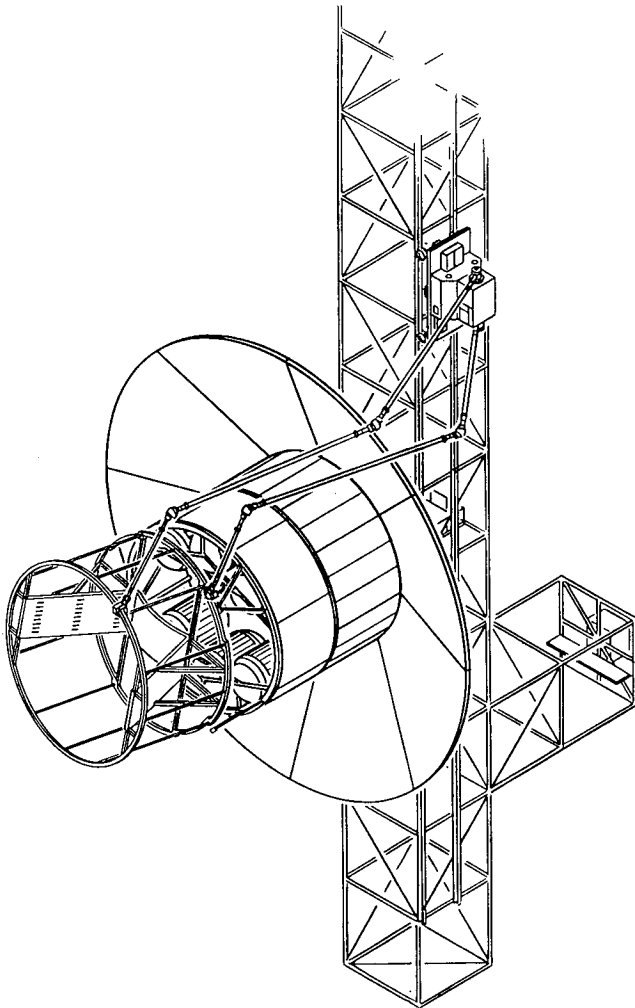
Rigid Aerobrake Assembly Number 3
